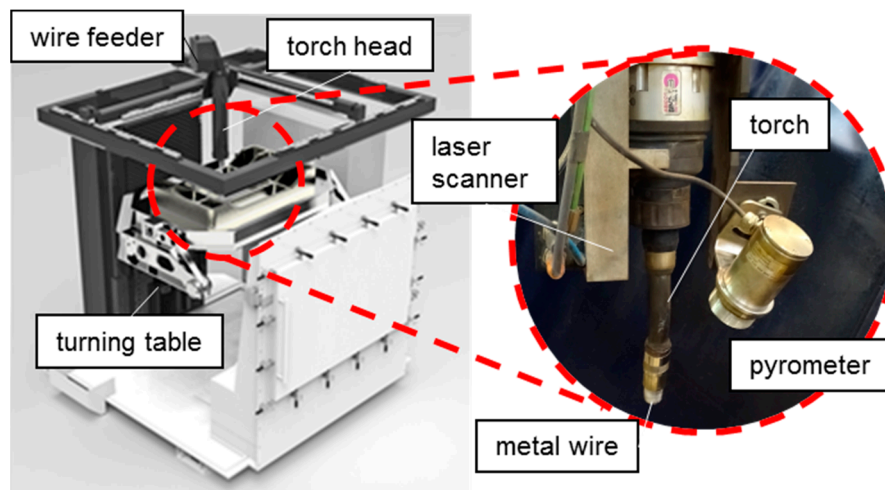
Addilan Additive Manufacturing (AM) machine; the welding torch equipped with a geometrical laser scanner and a pyrometer.
